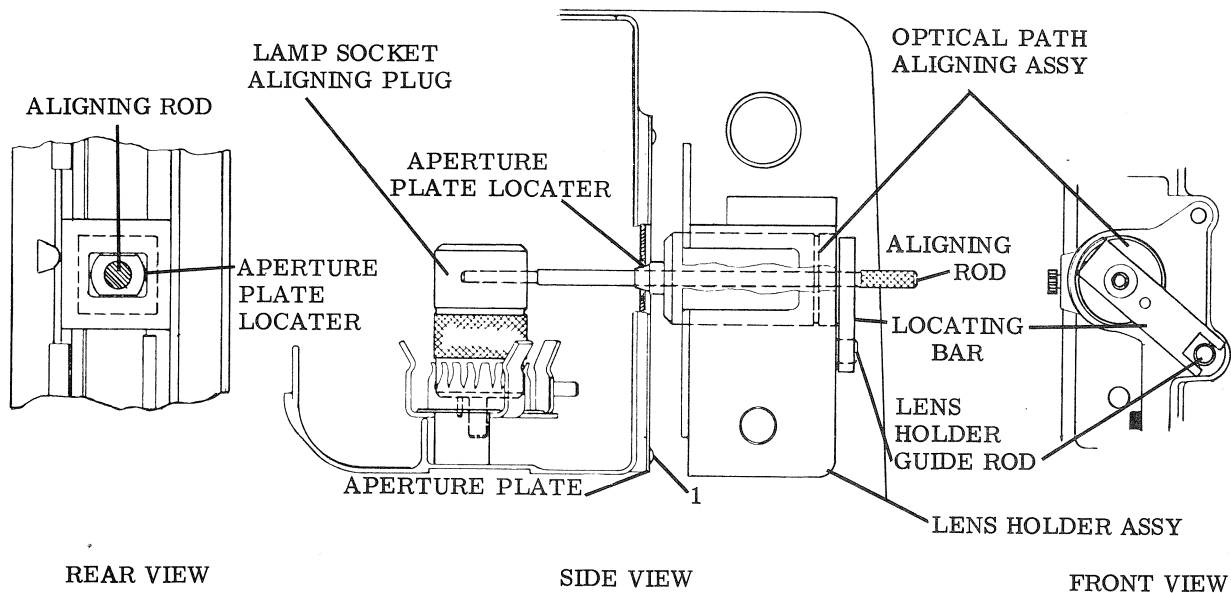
APERTURE PLATE & LAMP SOCKET ALIGNMENT
